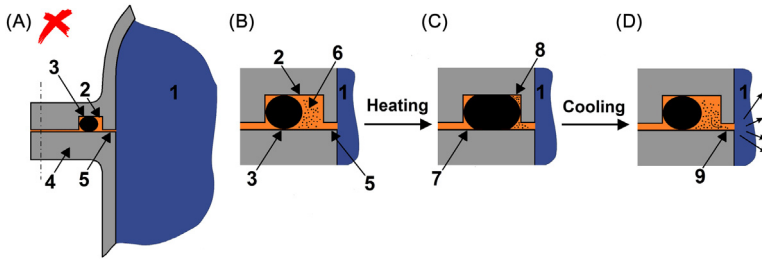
(A) A conventionally designed right-angled groove (2) contains an O-ring (3) that is compressed between the sealing faces of two stainless steel surfaces (4) to separate the product area (1) from the outside. (B) Such a rectangular groove–O-ring design invariably create gaps and crevices (5) that are impossible to clean in-place and/or to sterilize in-place. The groove provides sufficient space for microorganisms (6) to enter via the crevice. (C) During heating, due to the difference in thermal expansion between metals and elastomers, the O-ring will expand (7) to cover an increasingly larger surface of steel, protecting microorganisms (8) trapped between the O-ring and the steel surface against contact with hot water, chemical solution or steam. (D) After cooling down and shrinkage of the seal, the surviving microorganisms may be released (9) and will multiply and contaminate the product (Lelieveld et al., 2003; Hauser et al., 2007).
